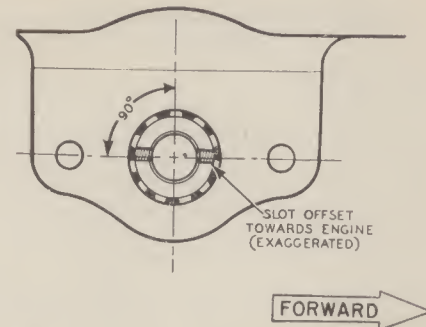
Correct position of the ignition unit drive slot when viewed from the ignition unit mounting pad surface.
